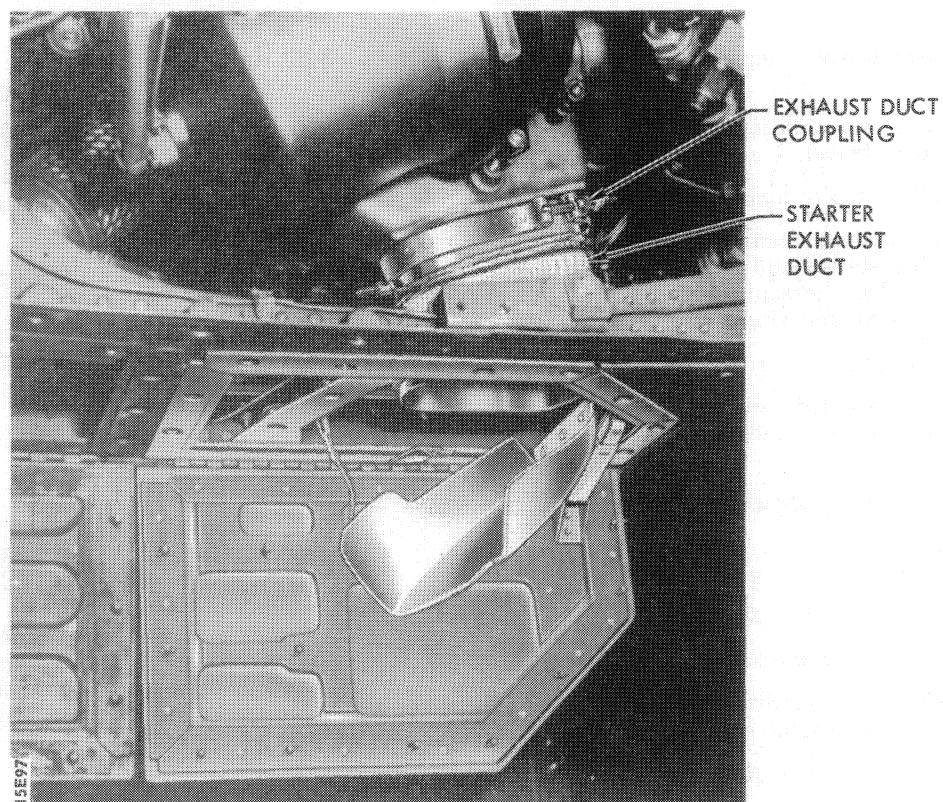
Starter Removal and Installation (Sheet 2 of 2)
